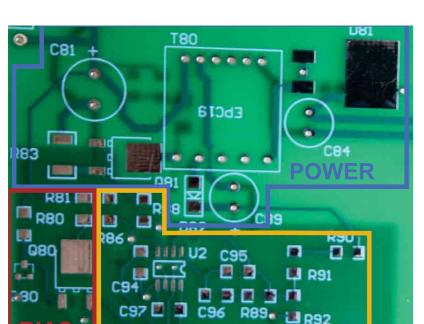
PC board layout of the flyback converter ready for parts population and testing.
